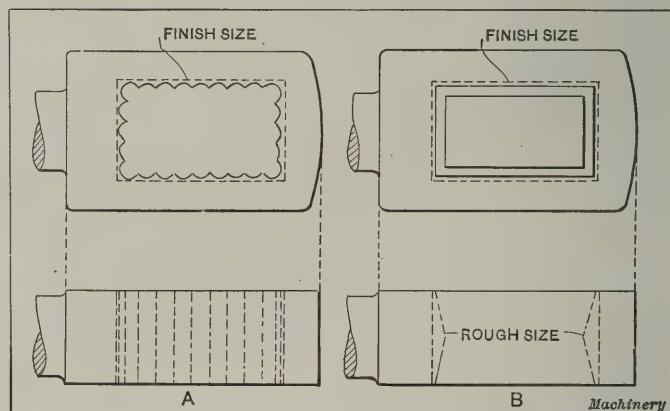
(A) Rod End Blocked Out by Drilling. (B) Rod with Forged Hole
